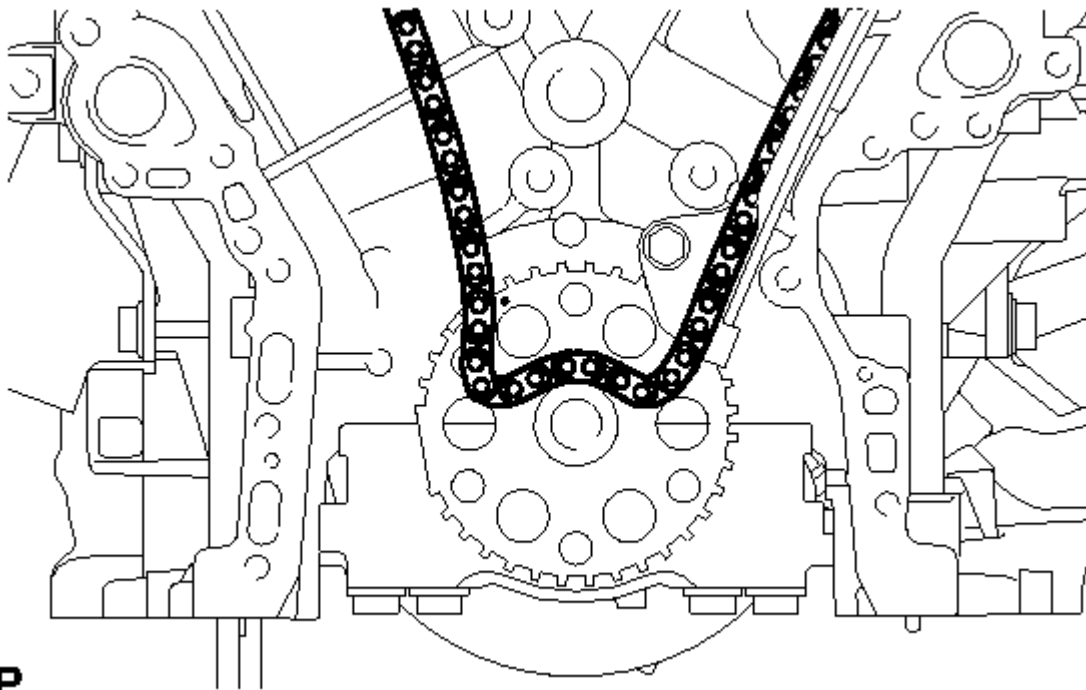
Turning Crankshaft Counterclockwise 10° To Loosen Chain Of Crankshaft Timing Sprocket
